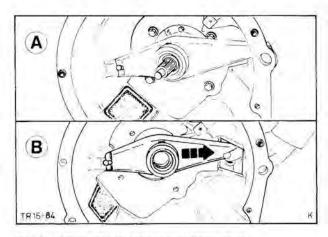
Remove thrust bearing and release lever A - Detach clutch housing
